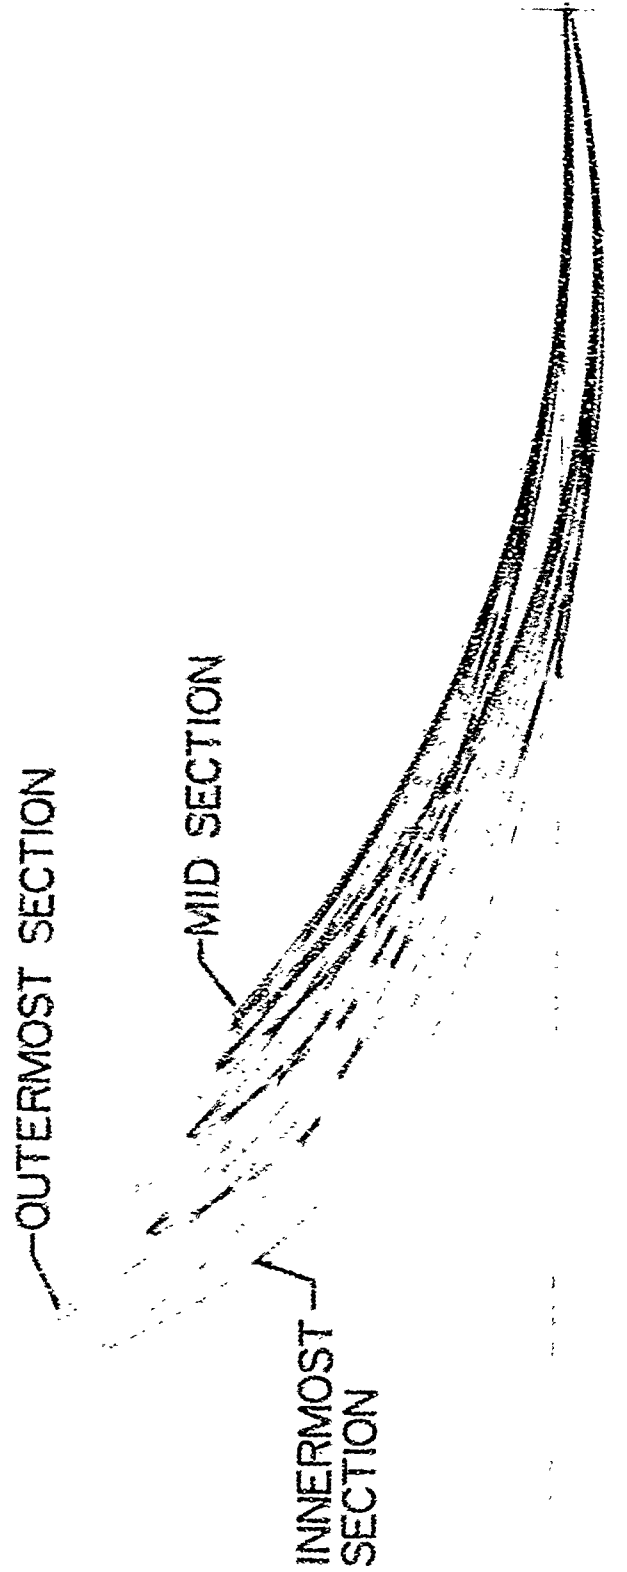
Superimposed Plans of Stator Blade Cartesian (Manufacturing) Sections
